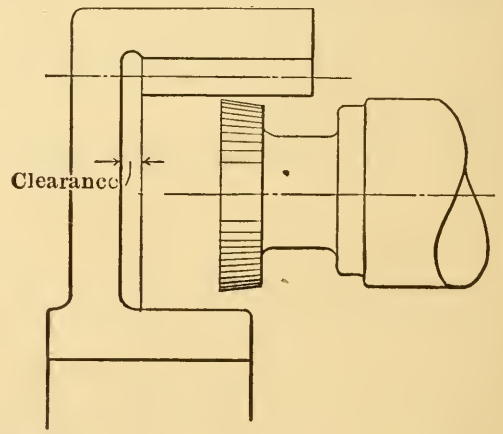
CLEARANCE FOR INTERNAL GEARS.
